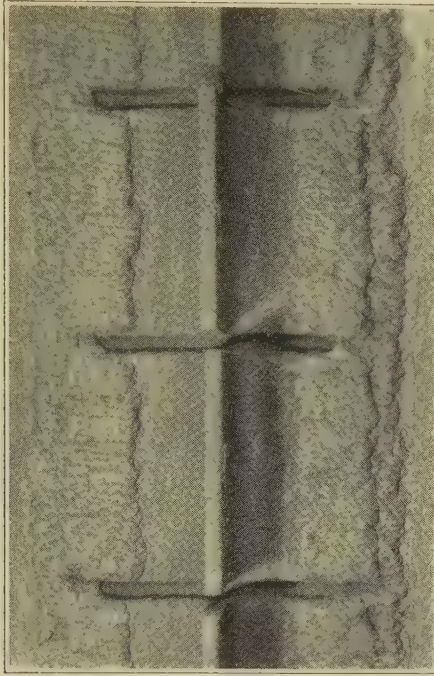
Test No. 5, after completion of welding and before test to destruction.
